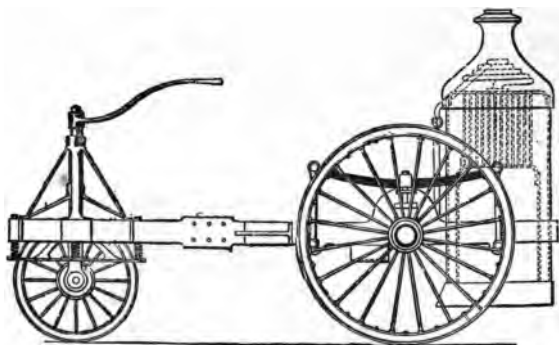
Catley & Ayres' Steam Road Carriage (1869).
